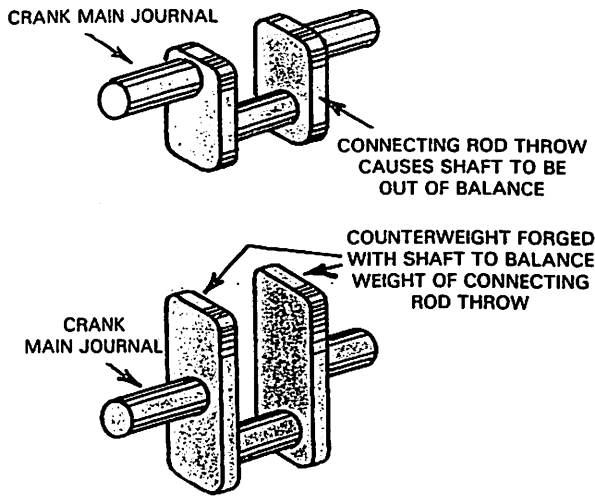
Crankshaft needs counterweights to bring shaft into proper balance.
